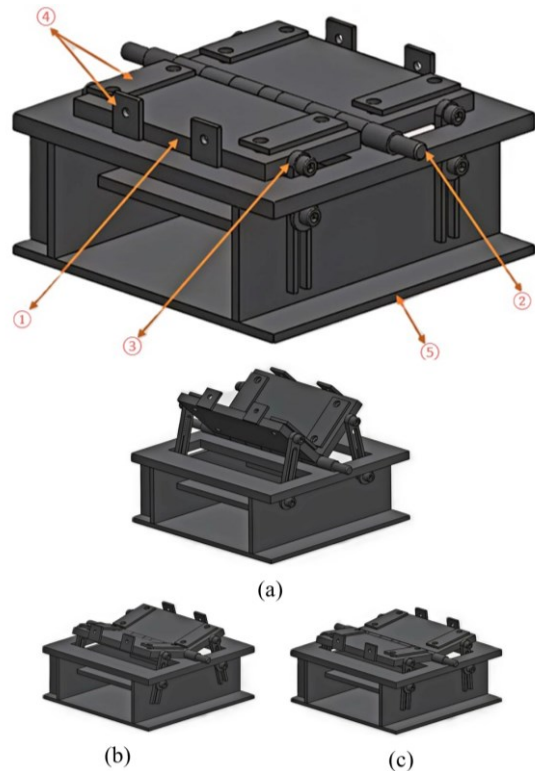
Schematic of the adjustable steel fixture used in the FSW setup, illustrating its main structural components: (1) workpiece support platform, (2) hinge assembly for angular adjustment, (3) angle-adjustment lever, (4) clamping units, and (5) rigid base plate. Fixture configurations for three joint-angle setups: (a) 90° , (b) 150° , and (c) 165° .
